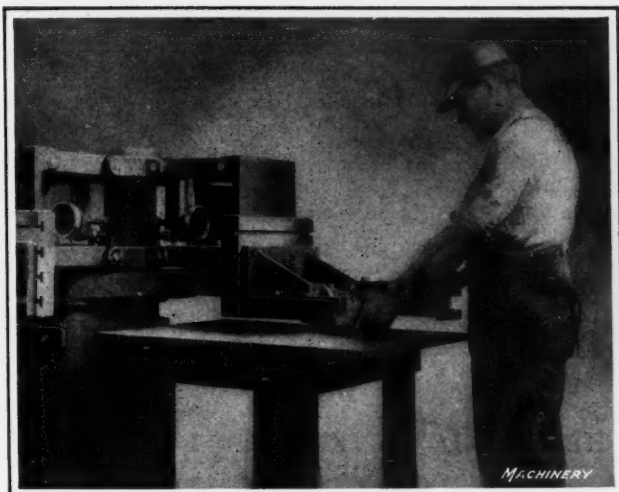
Operator loads Machine by placing Work in Suitable Fixture carried on Work-table
